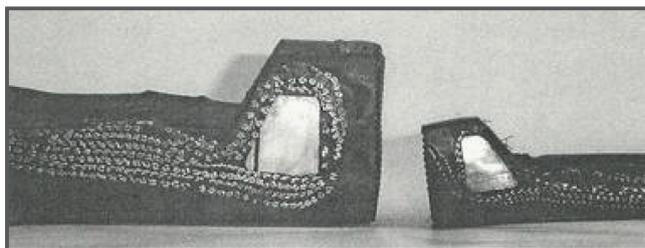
Two cutaway sections of the Corflex Pinch Valve Sleeves.
